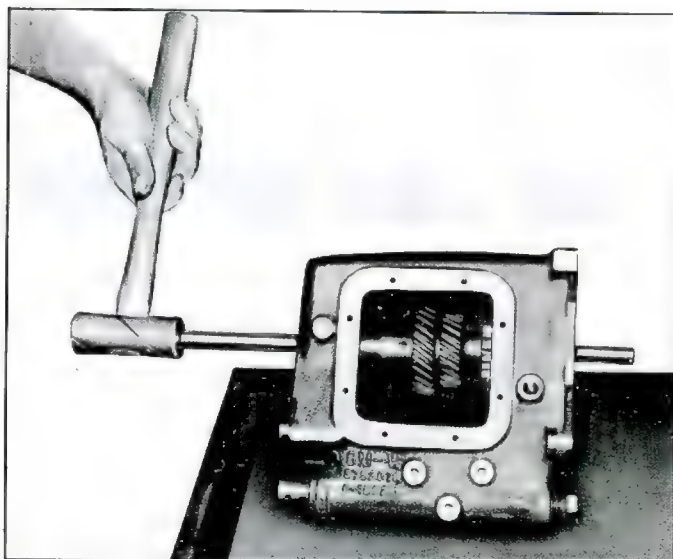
B-8—Removing Countergear Shaft with Dummy Shaft
